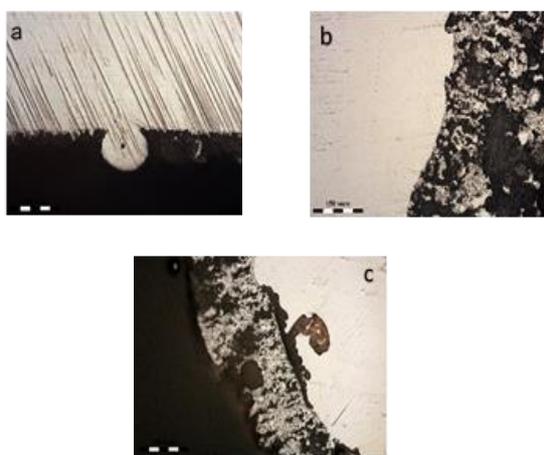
Cross-sectional structure of burn-in layer and near-surface area of VT1-0 and VT6 titanium castings, formed during casting in Y_2O_3 molds with phosphate-bonding ($\times 250$): (a) VT6 mould heated to 25 $^{\circ}\text{C}$; (b) VT6 mould heated to 550 $^{\circ}\text{C}$; (c) VT1-0 mould heated to 25 $^{\circ}\text{C}$
